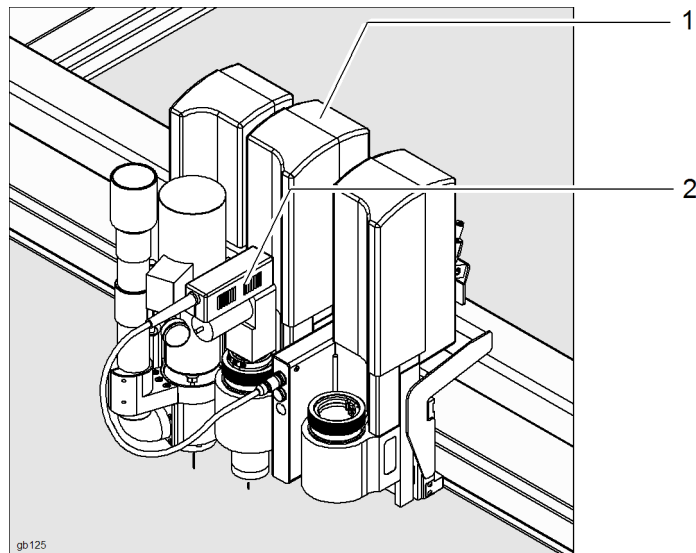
Tool slot, tool assignment e.g. Module 2, tool 1
